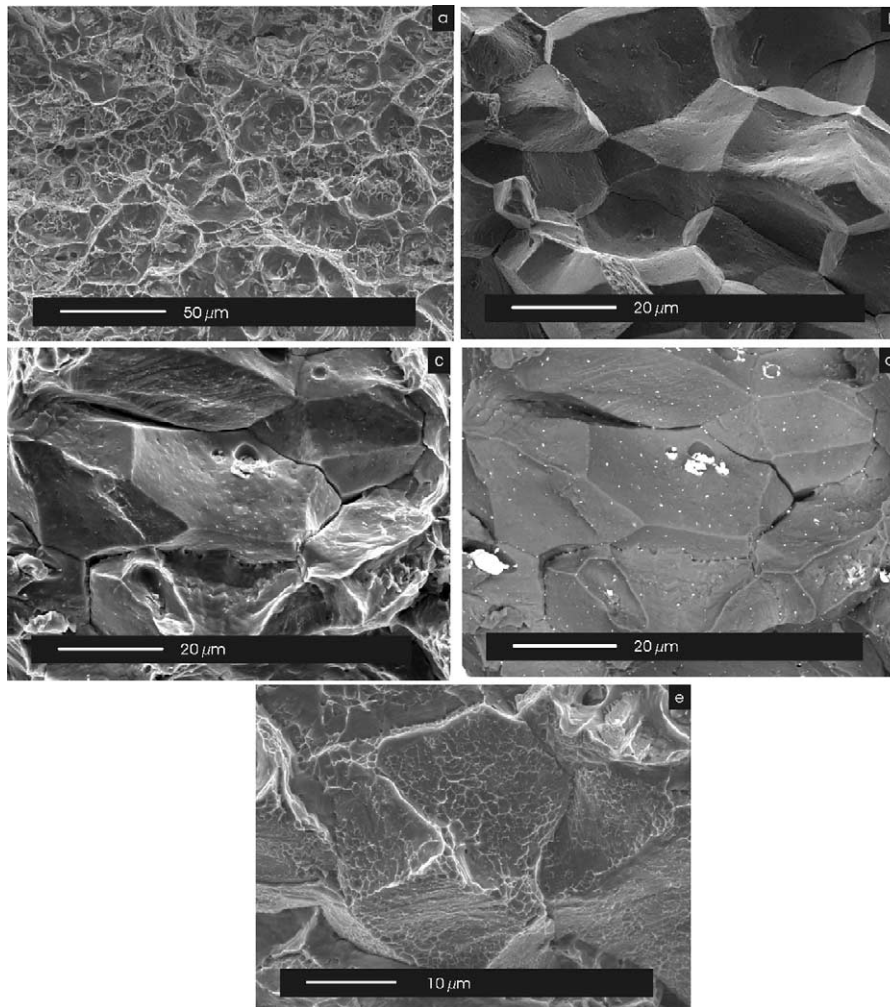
Typical fracture surfaces. (a) Transgranular microvoid coalescence; (b) brittle intergranular fracture at high temperatures; (c) intergranular fracture at $T < T_m$; (d) as (c), but using BSE detector showing lead particles; (e) intergranular fracture showing ductility in the form of dimpled facets.
